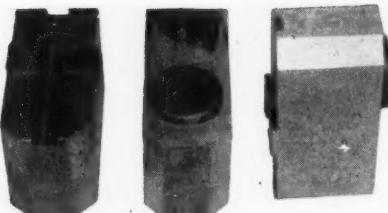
A bottom view of a standard soft chuck jaw is shown at the left, while the view in the center shows the same type of jaw fitted with a hardened replaceable insert. The view on the right shows a jaw with insert in a side position.
